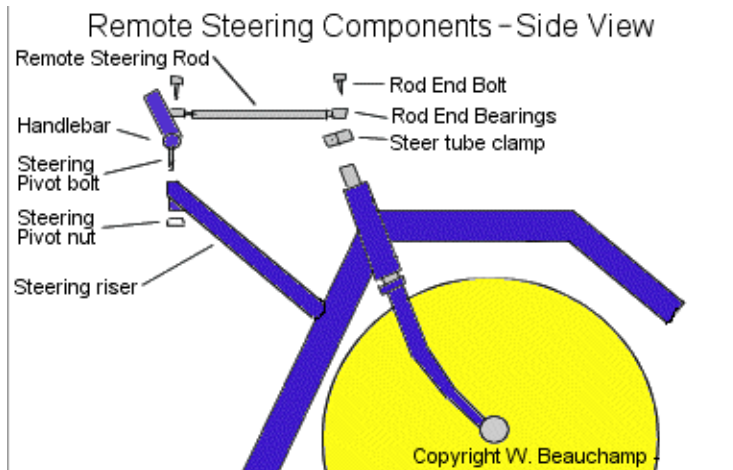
Steering riser mounted to bike frame to support the remote steering components
